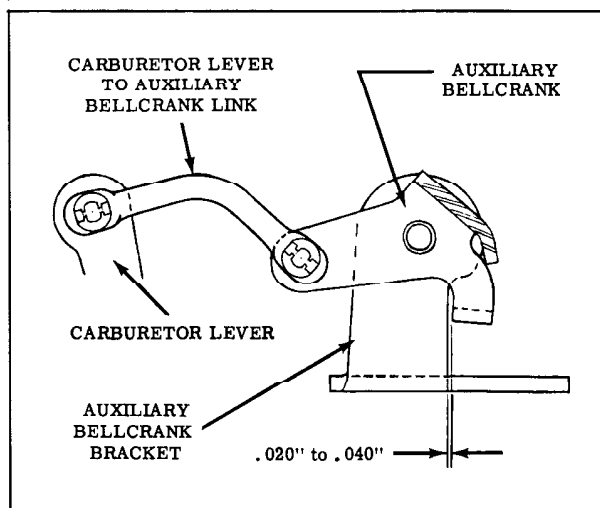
Carburetor Lever to Auxiliary Bellcrank Adjustment (2 Barrel)
